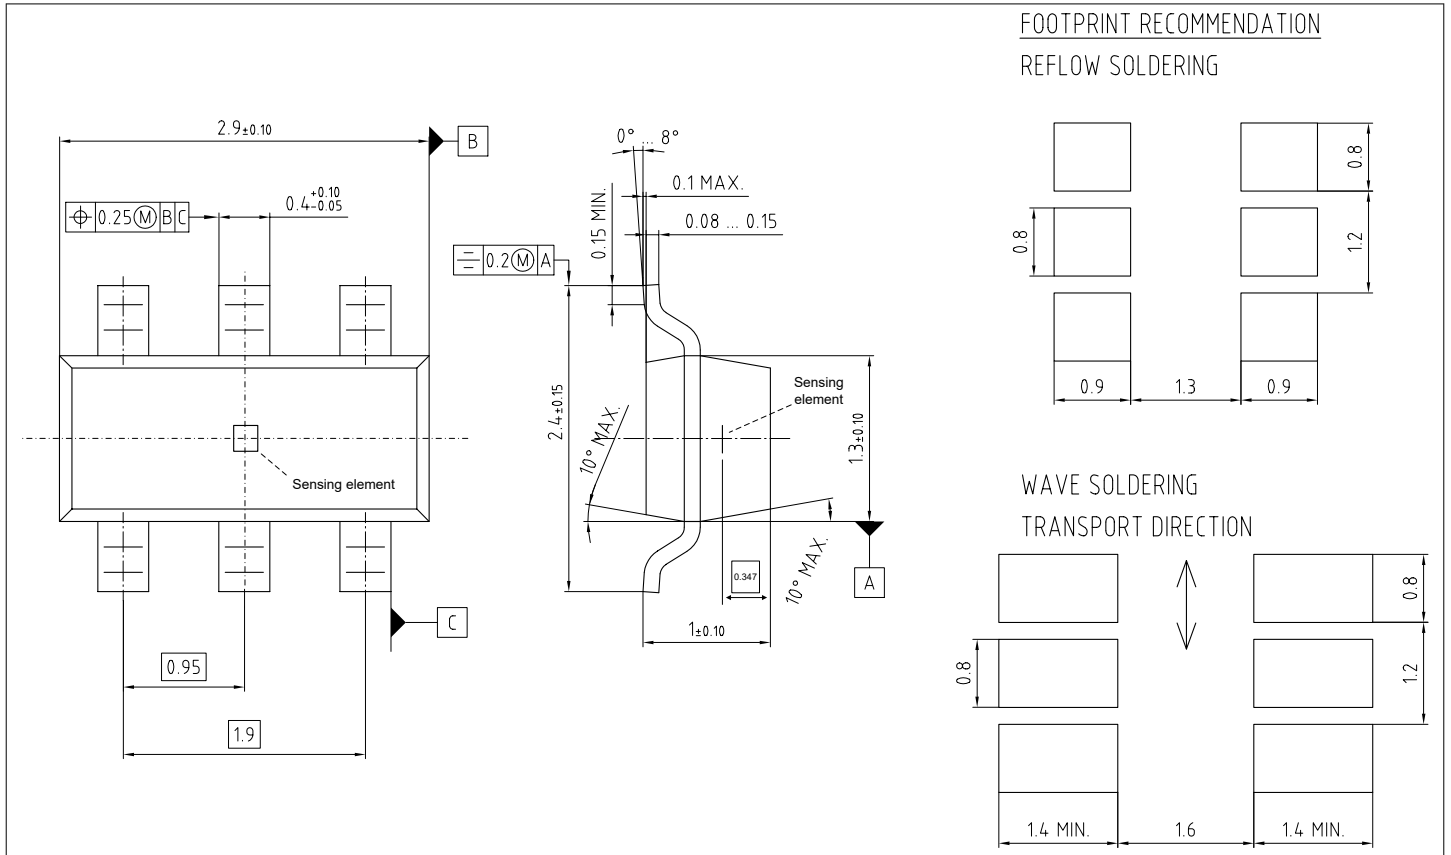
PG-SOT23-6-4 package outline. Sensing element dimensions and position are not in scale
